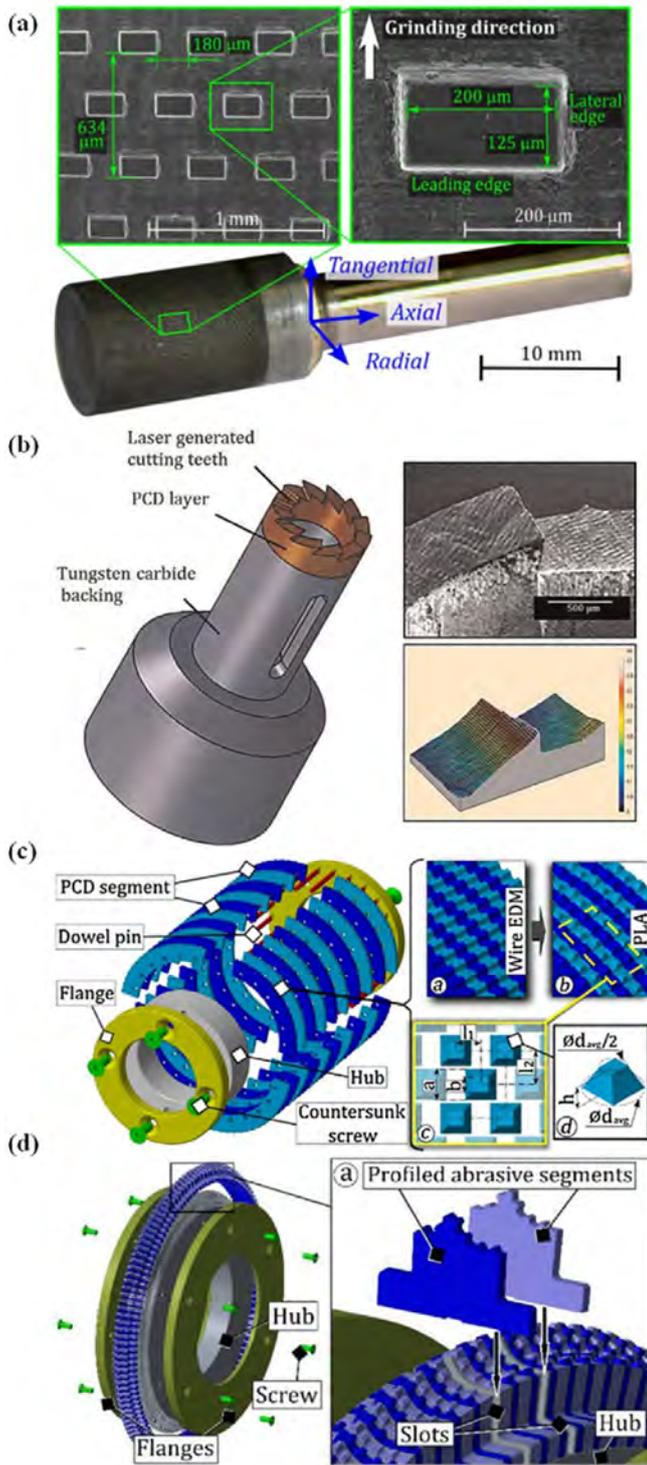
Novel grinding tools with abrasive grains of controlled shape and protrusion produced by using pulsed laser ablation technique [7,106,142,143]: (a) grinding tool with square grit shape, (b) core drill with micro-cutting teeth, (c) design and manufacturing route for a novel roller dresser, (d) design details for a profiled rotary dresser.
